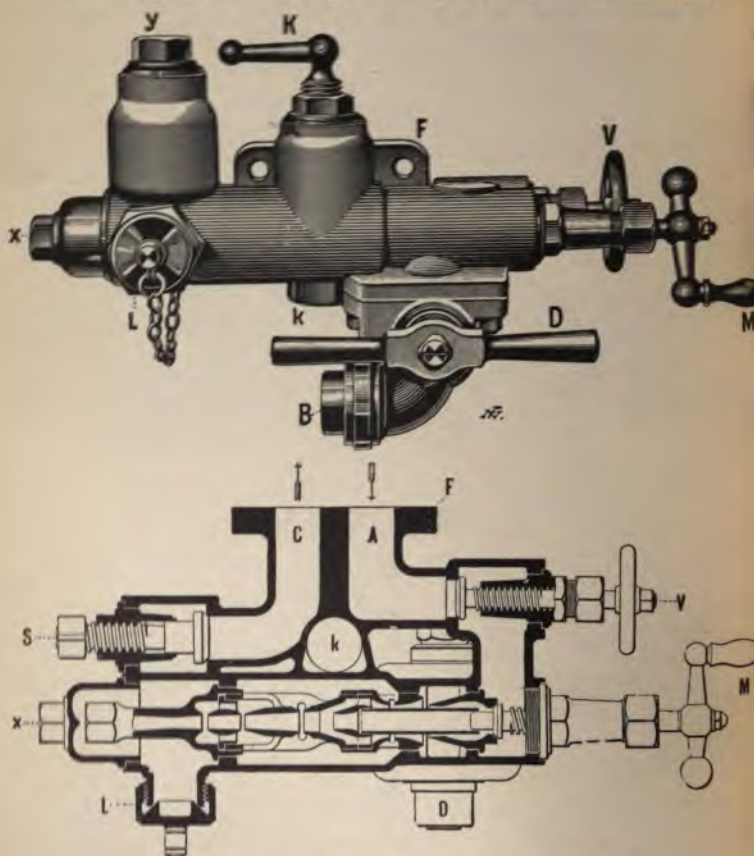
The Friedmann Injector, Horizontal Combination Type.
